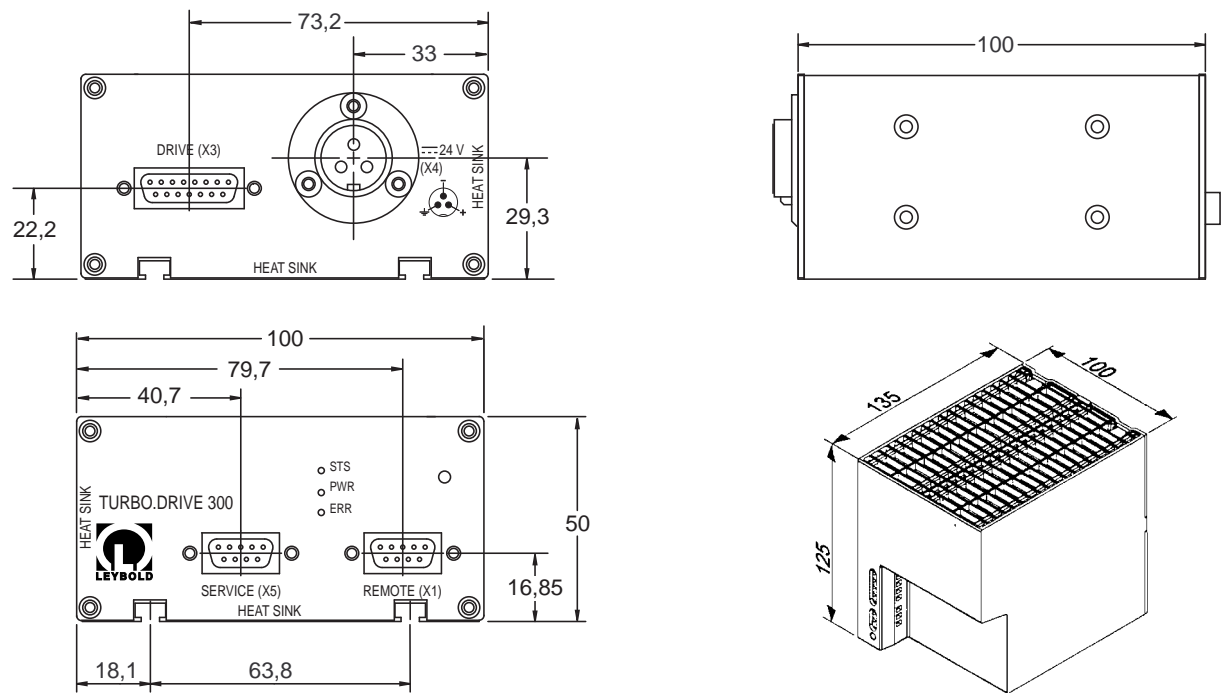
Dimensional drawing for the frequency converter and the OEM power supply unit, dimensions in mm
